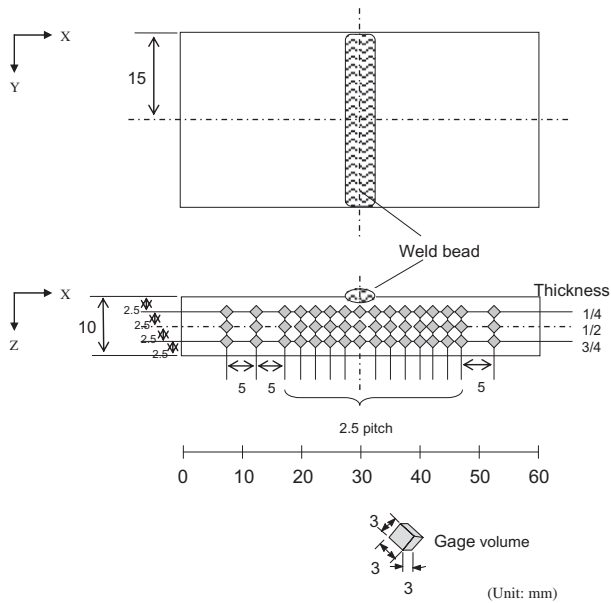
Measurement locations on the welded type 316L specimens.
